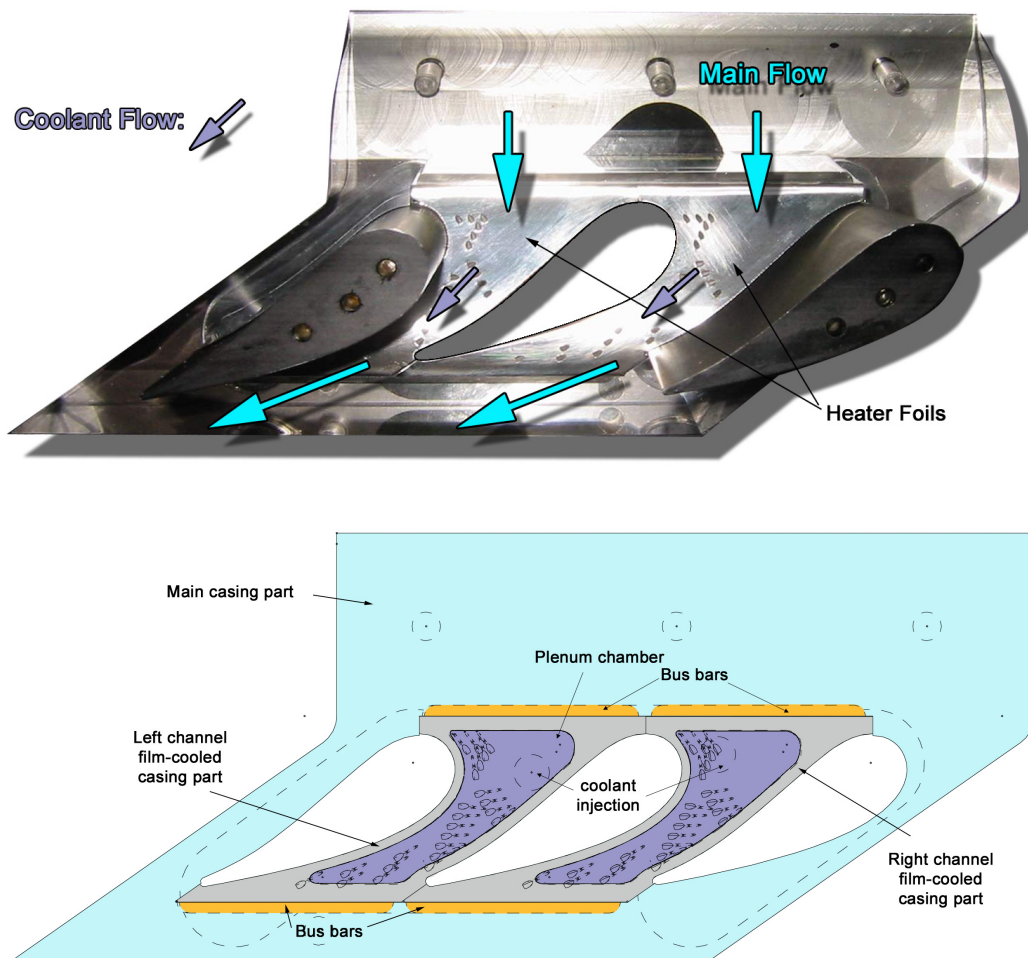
Picture and Drawing of the Film-Cooled Casing Platform
